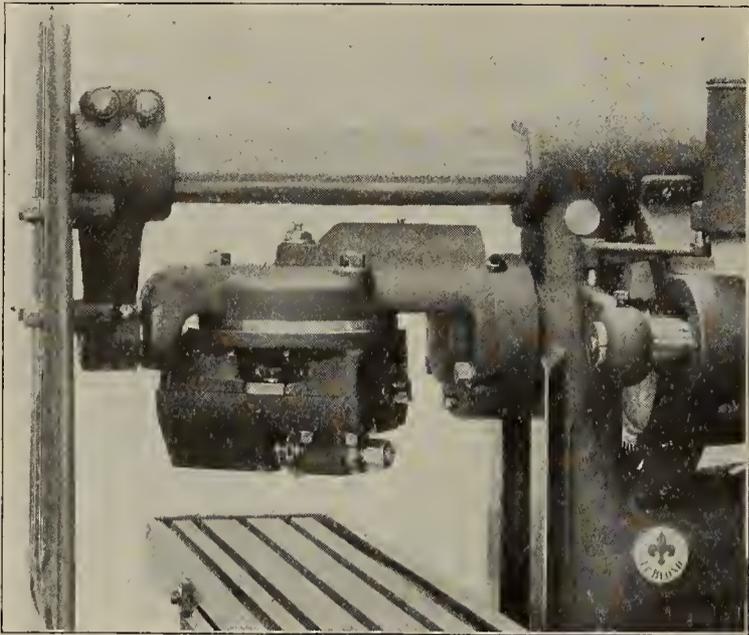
UNIVERSAL SPIRAL GEAR CUTTING ATTACHMENT.
